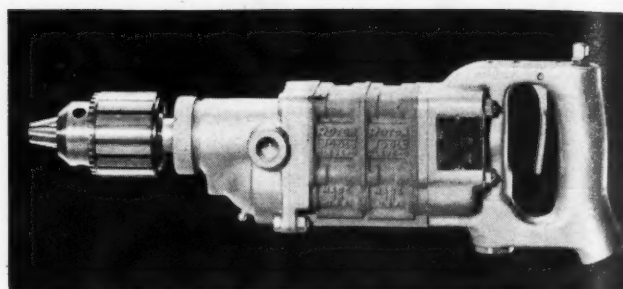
Air Drill Equipped with Spade Handle, Made by the Rotor Tool Co.
